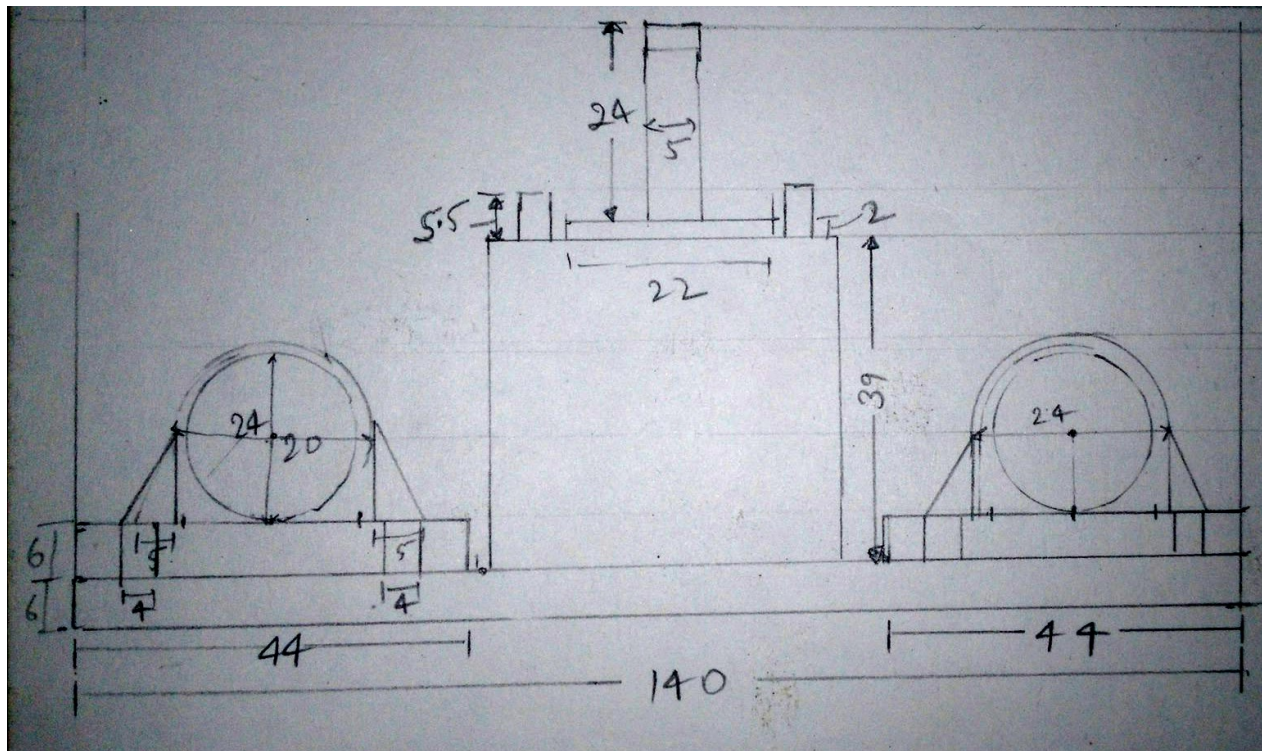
ED diagram (SIDE VIEW) of the X-axis part containing the Fig6. part both the sides through which PVC pipes will run, a chassis acting as the base holder for the Y-axis part and a stepper motor attached to this chassis.
